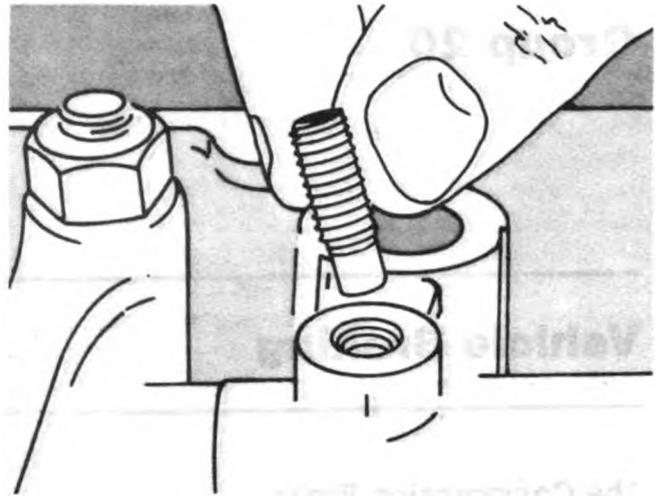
Remove The Setscrew From The Rocker Lever Housing.
